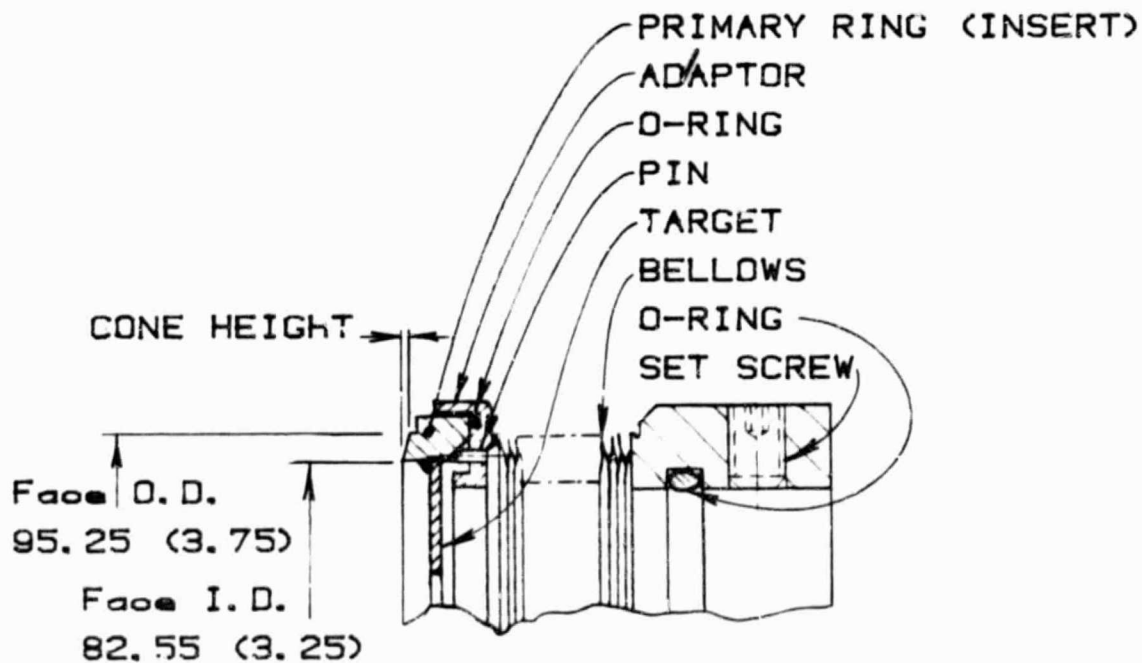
CONED FACE PUSHER TYPE SEAL BALANCED TO
